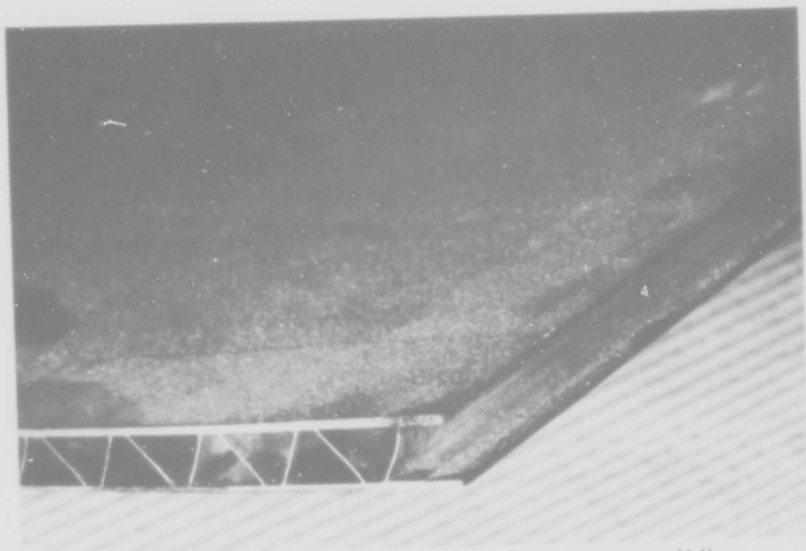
LOWER TANK PANEL, TRIMMED AND MACHINED⁽¹⁴⁾
